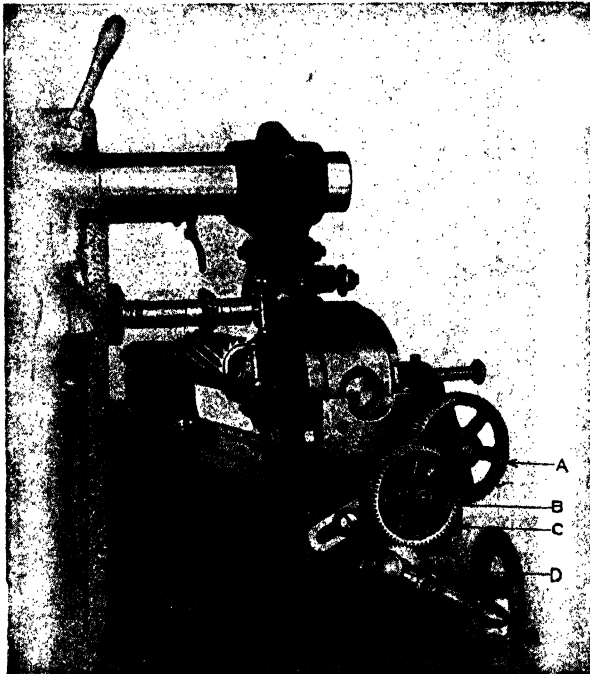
Spiral Milling. A—Gear on worm (driven): B—First gear on stud (driver). C—Second gear on stud (driven). D—Gear on screw (driver).
